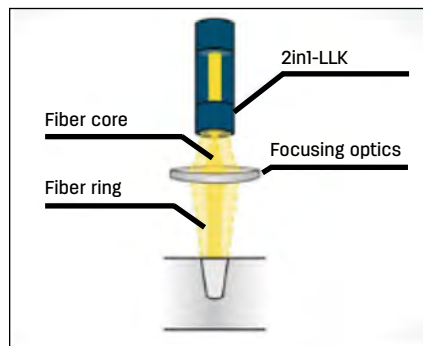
BrightLine Weld beam shaping. Note: LLK stands for laser light cable.
